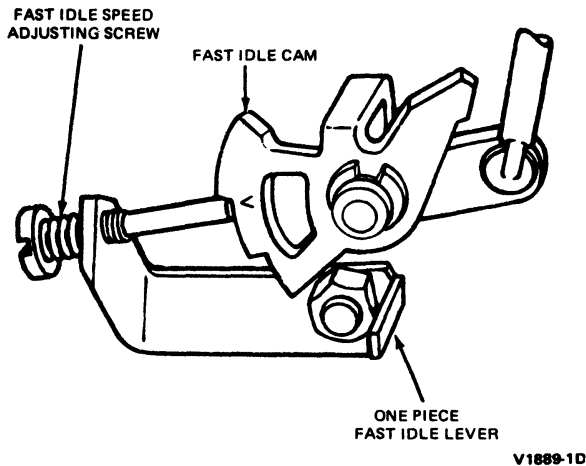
Fast Idle Speed Adjustment—Automatic Choke Carburetor
